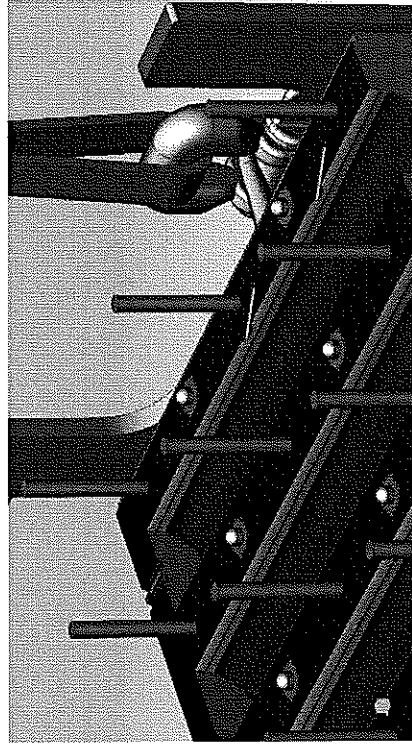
RENDER OF THE MOLD SHOWING THE INDENTATIONS MACHINED IN FORM #3, WHERE THE TC VOID TUBES WILL RESIDE, SHOWN IN BLUE.
